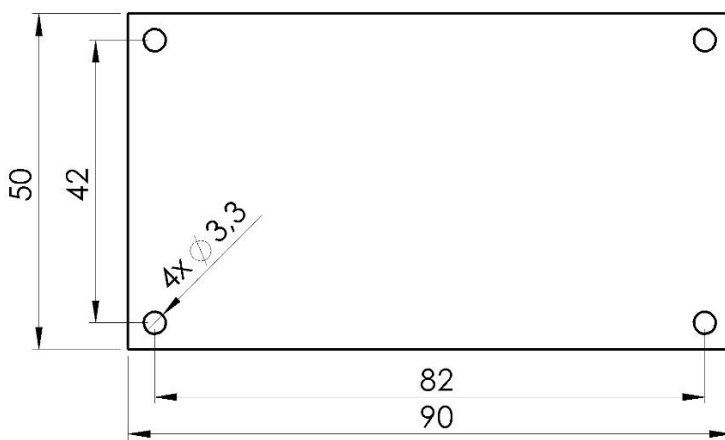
PMT u-CSA&SA EVM board dimensions.
